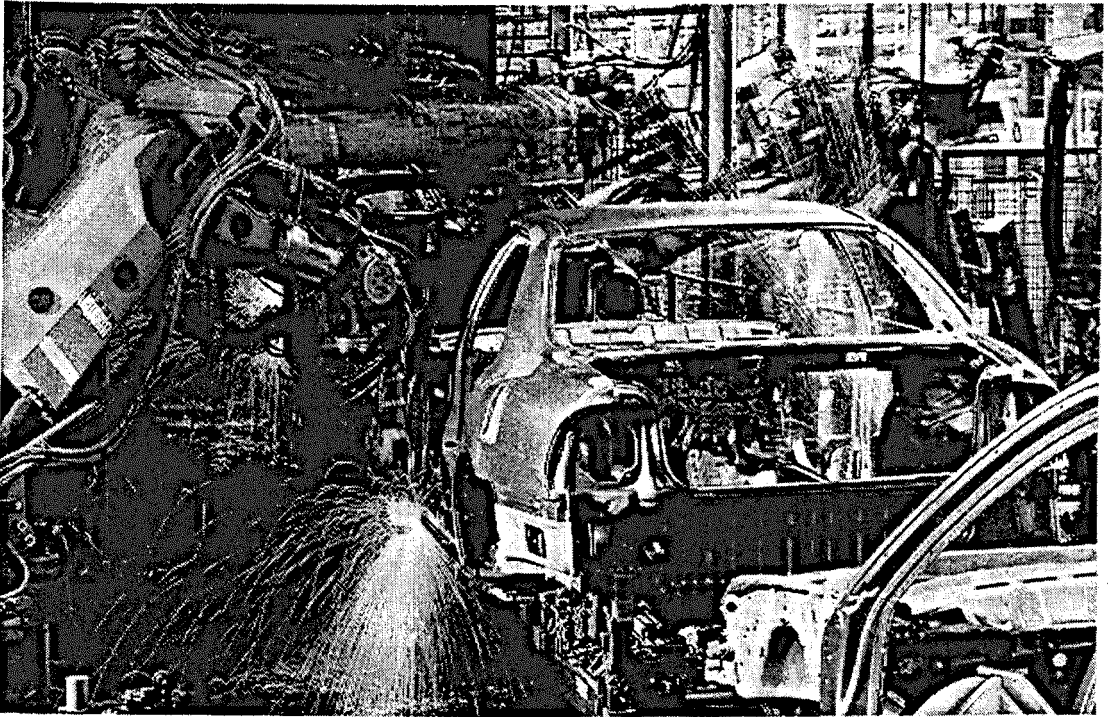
Resistance spot-welding of a full vehicle body [Anon (1994d)]
